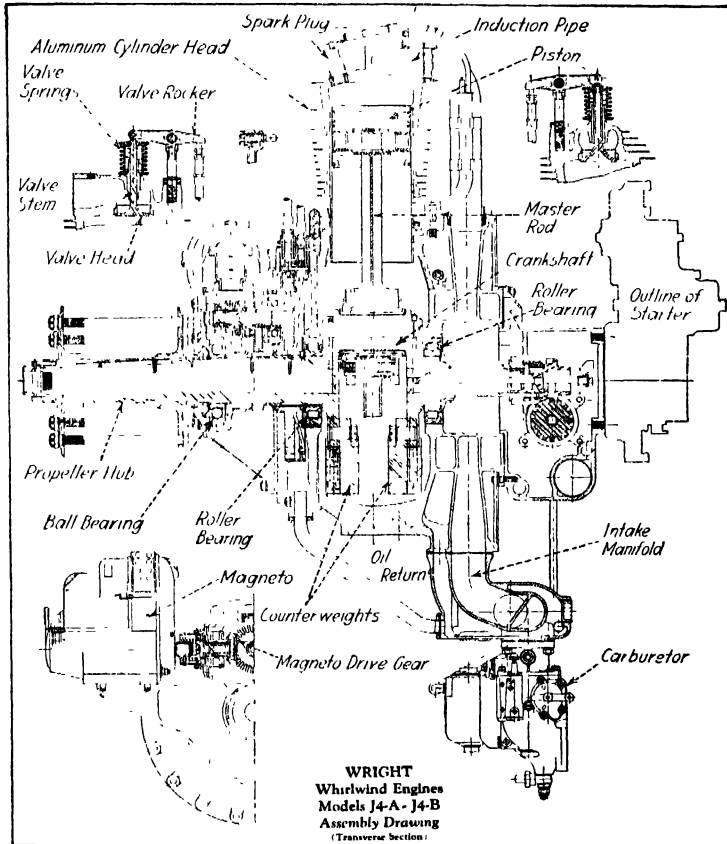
Transverse Sectional Assembly Drawing of Wright "Whirlwind" Engine Models J4A and J4B. Cylinder Construction is Now Different on J5 Engines.
